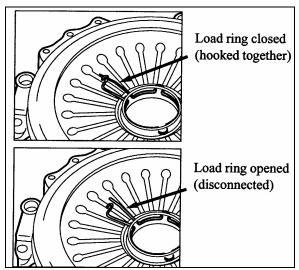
RELEASE BEARING RETAINING CLIP 07112
